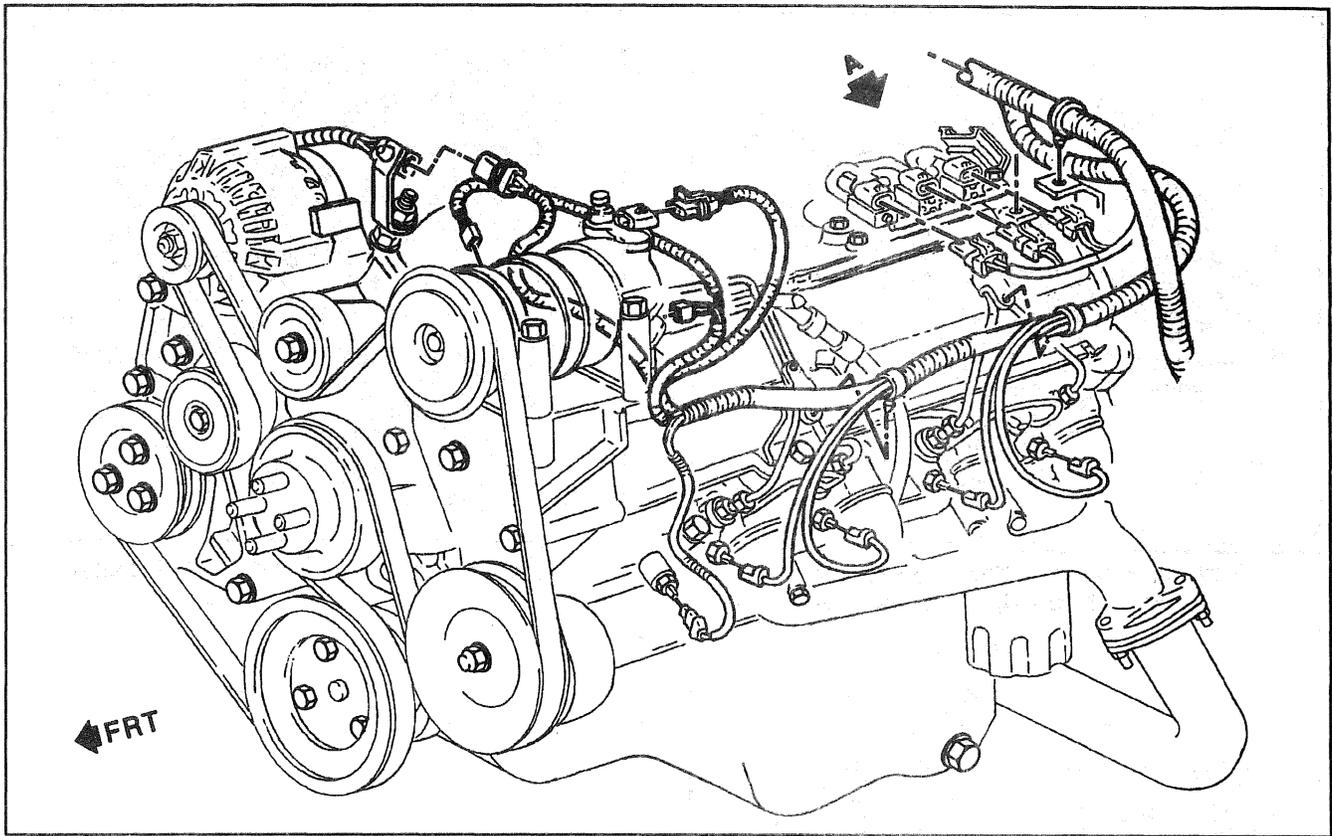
Engine Wiring - Left Side (6.5L Diesel Engines)
